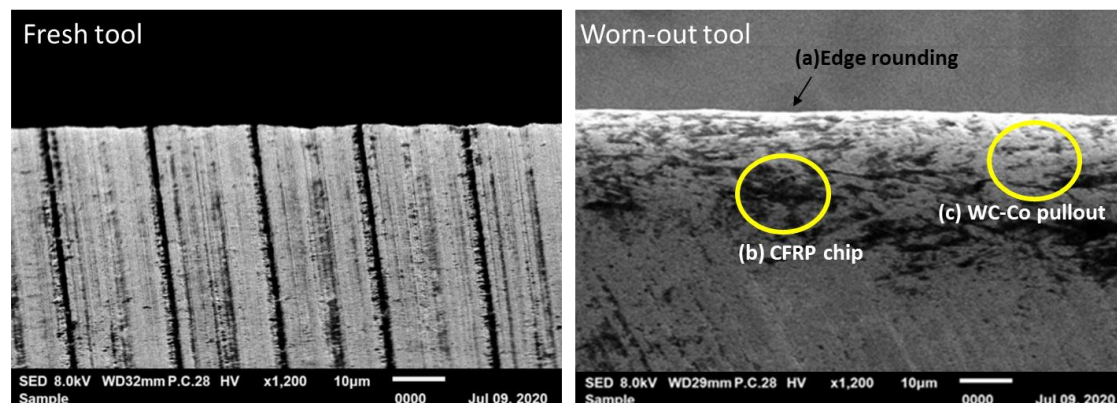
SEM images of (i) new cutting tool and (ii) worn out cutting tool after milling CFRP with 132 m/min after 3200 mm machining length.
